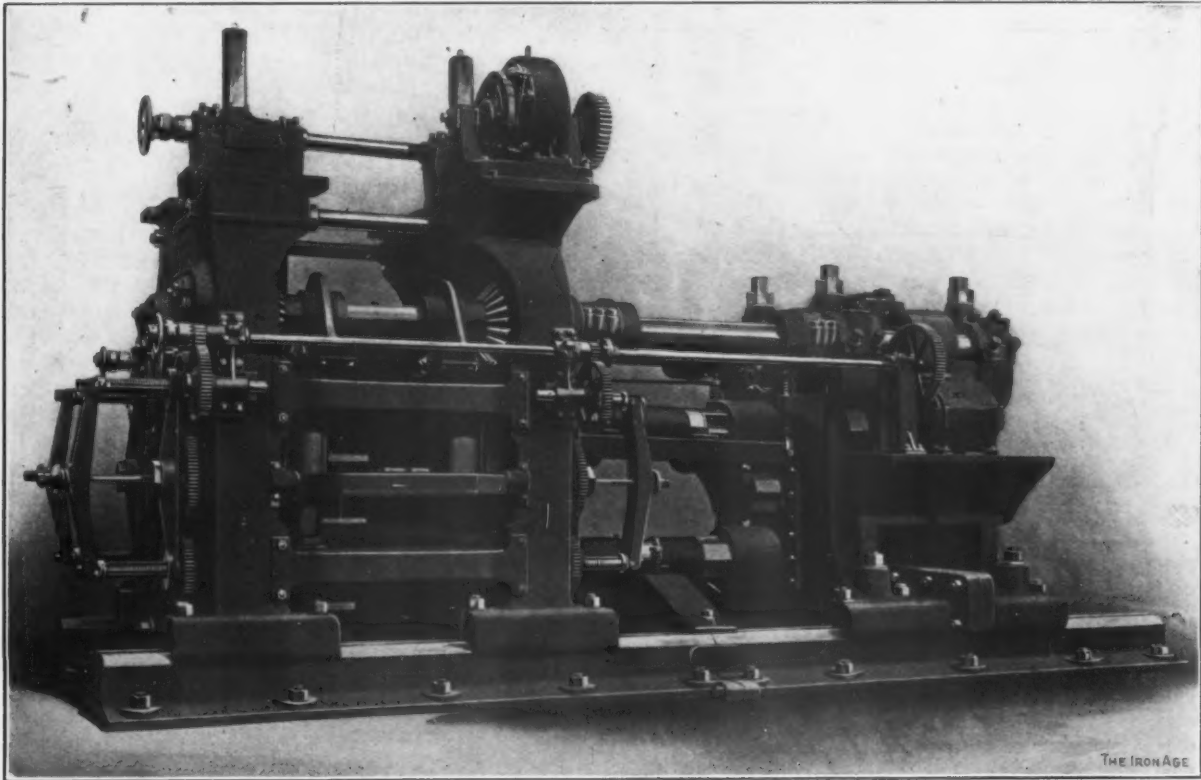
A Three-High 25-In. Universal Mill Installed for the National Tube Company by the A. Garrison Foundry Company, Pittsburgh, Pa.
